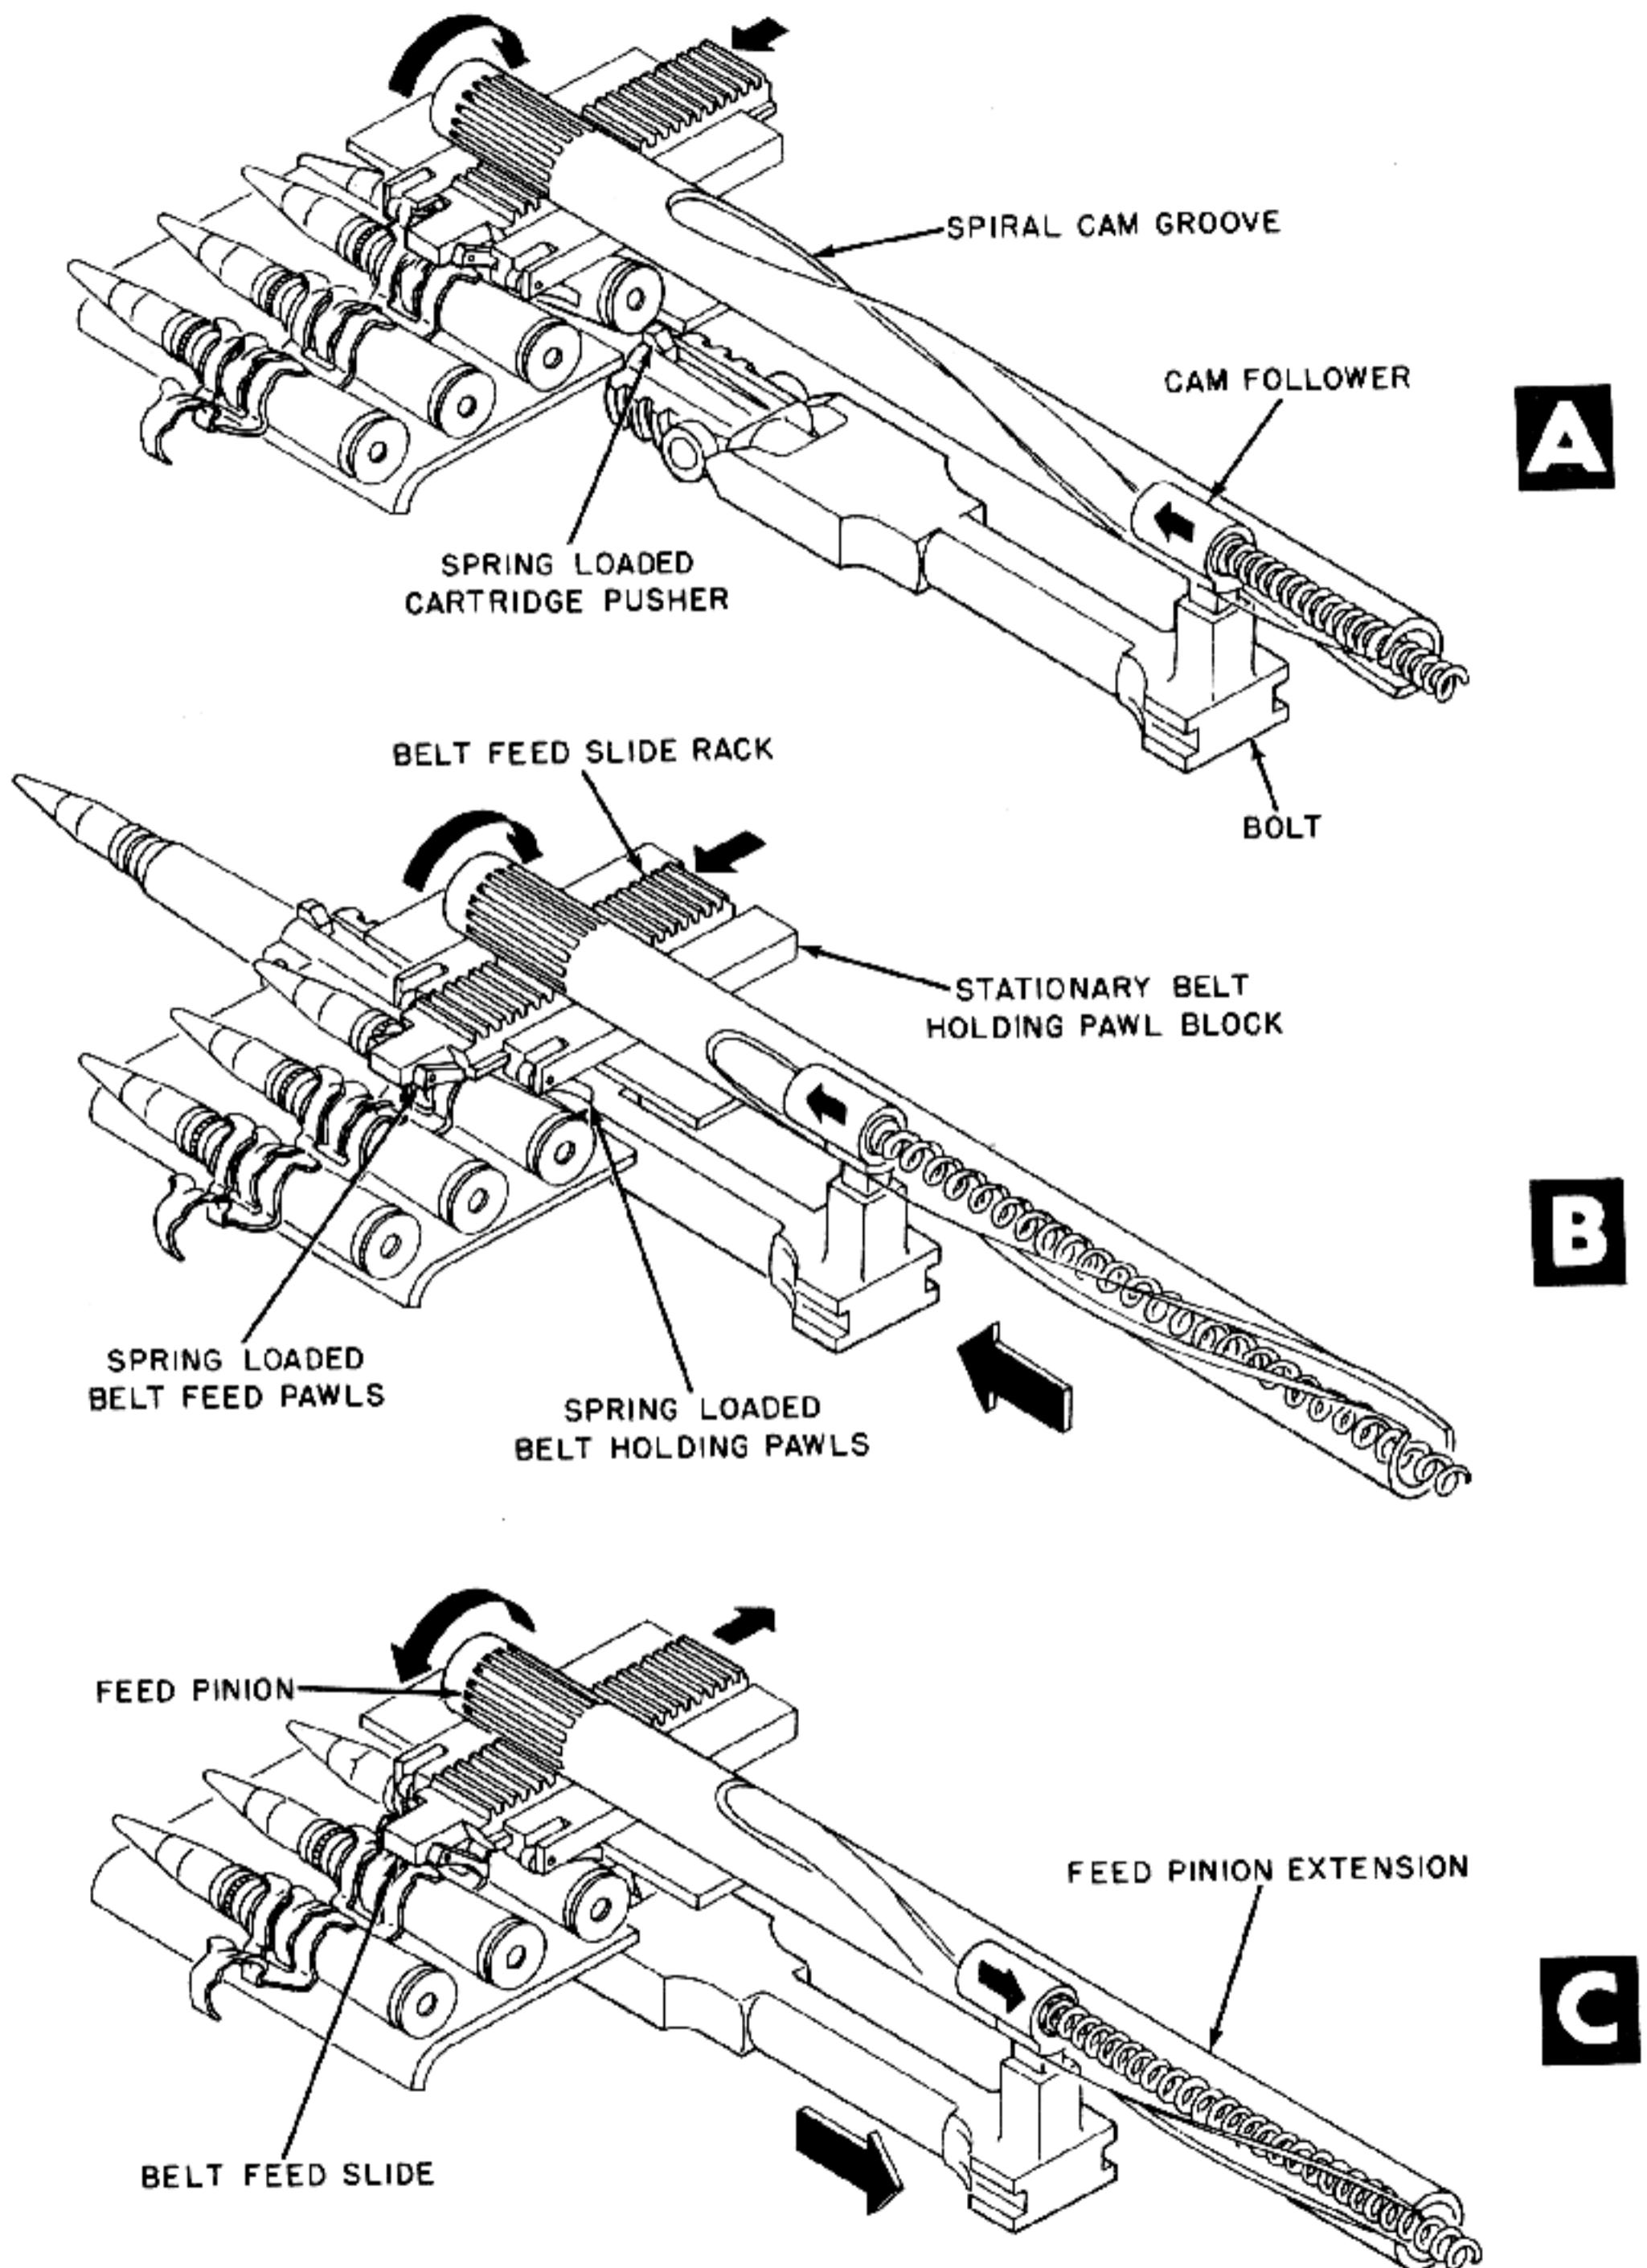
Follower on Bolt Rotates Feed Pinion Extension.
